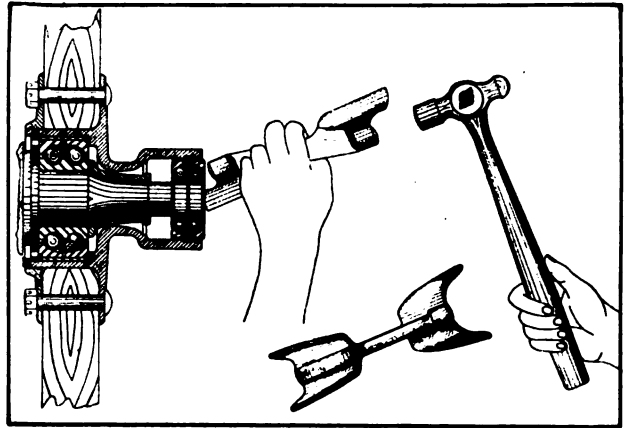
Illustrating Proper Method of Driving Bearings in Place with Yoke Member of Soft Metal.
